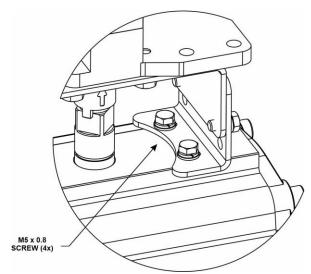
Positioner quarter turn rotary actuator mounting
